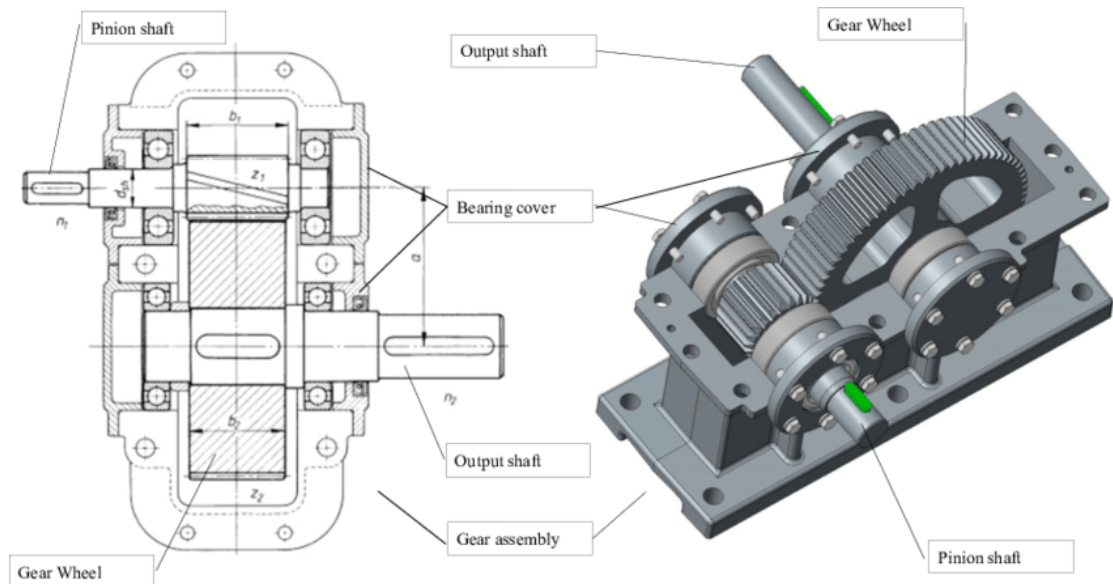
Example of a 2D drawing and 3D CAD model [11].
